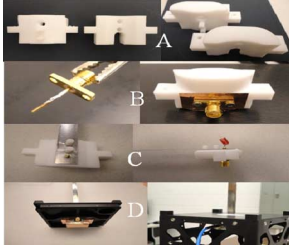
(A) Teflon clamp parts. (B) SMA connector with brass screw extending the center conductor, and Teflon holder. (C) Antenna element attached to the Teflon mount. (D) Antenna assembly.
